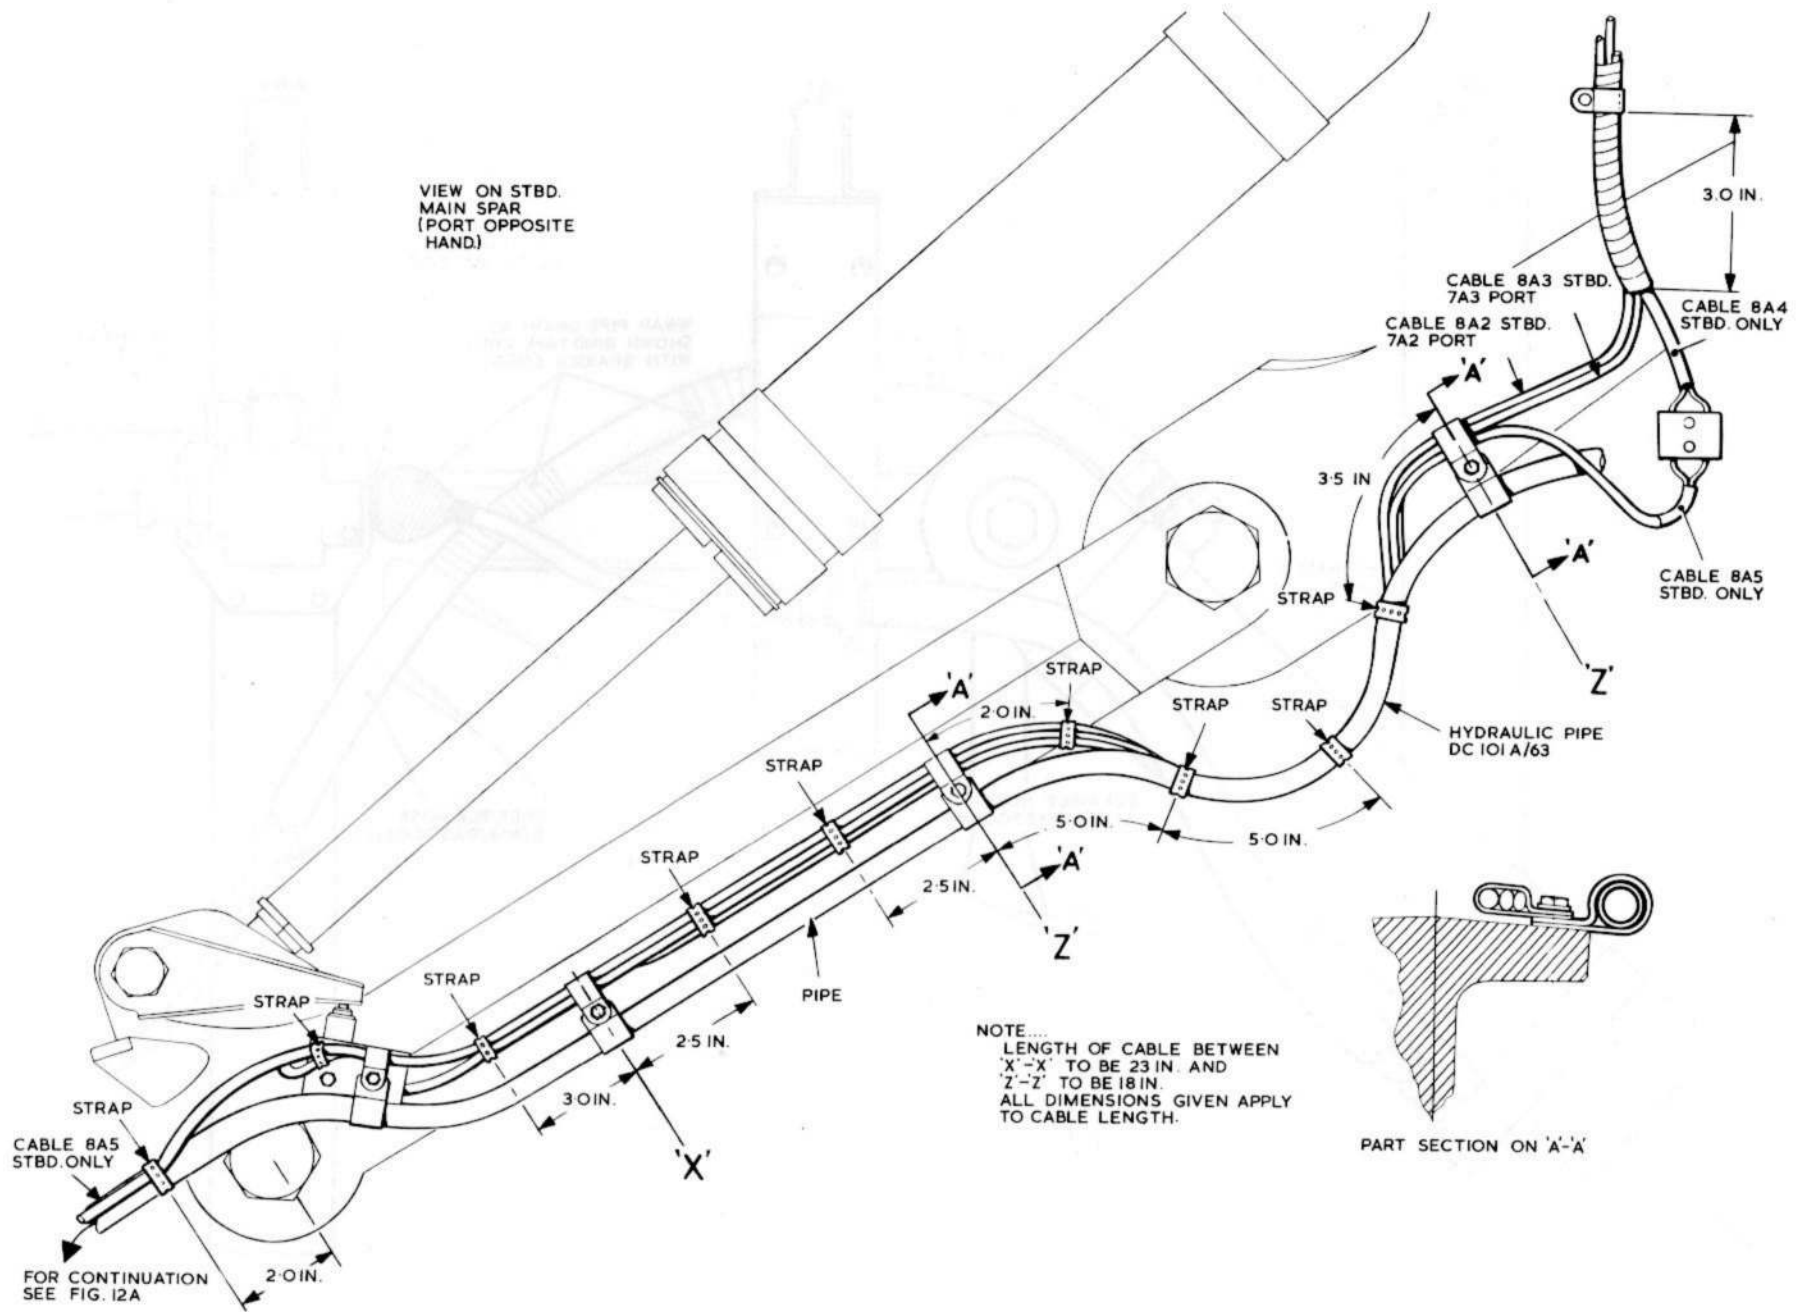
B. UNDERCARRIAGE - PIPING AND WIRING INSTALLATION
